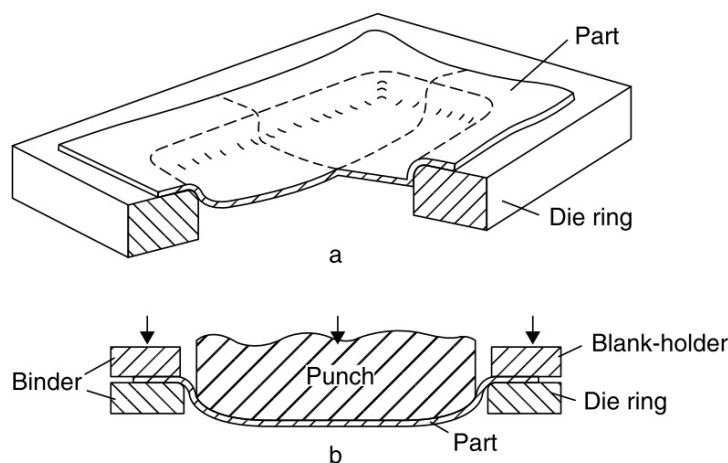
Schematic representation of the drawing process: (a) typical part formed over a die ring and (b) section of tooling drawing (Marciniak et al., 2002).
